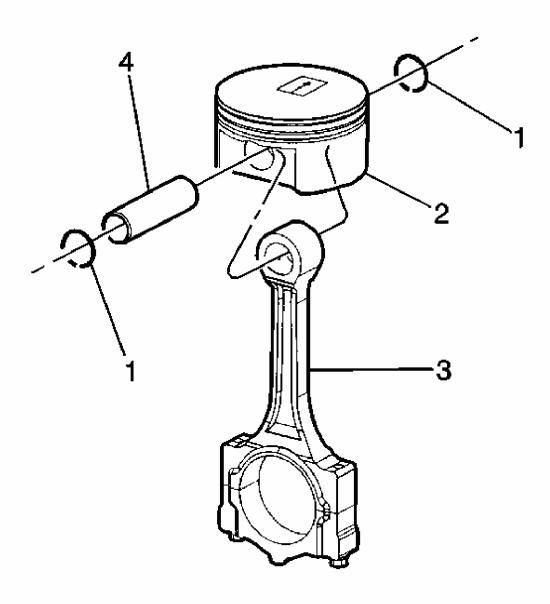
Exploded View Of Piston & Connecting Rod Assembly
